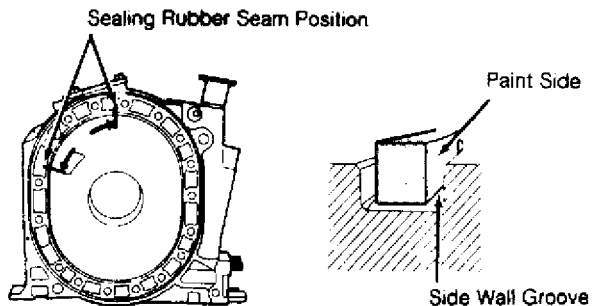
Positioning Sealing Rubber On Intermediate Housing
